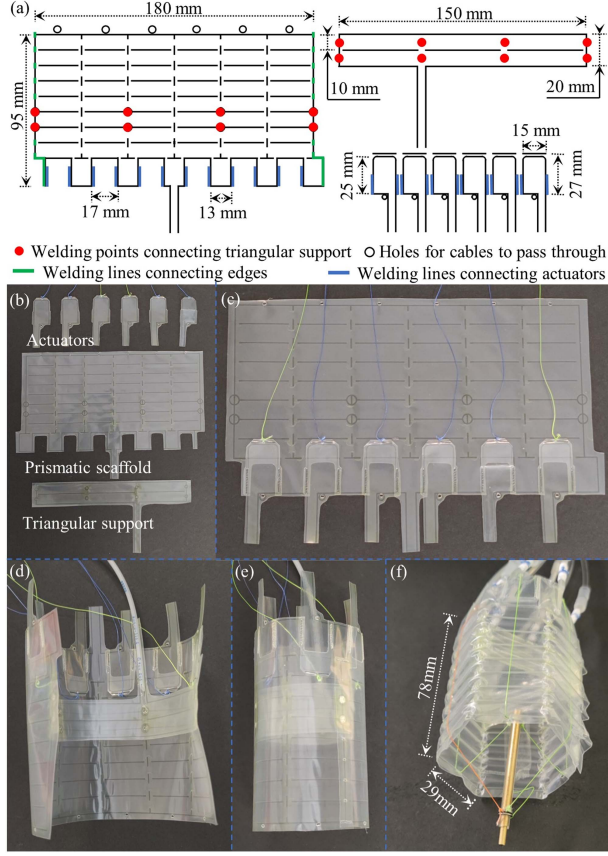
Robot fabrication. (a) Welding patterns for producing the scaffold layer (left), the triangular support layer (upper right), and the layer for actuators (lower right) with welding areas for their joining. (b) and (c) Cutting and manually welding actuators along blue lines in (a). (d) Manually welding triangular prism support according to red lines in (a) onto the hexagonal prism layer. (e) Manually welding edges along green lines in (a) to result in a cylinder shape. (f) Lastly, cables are connected to the brass tube end-effector and the robot structure can be inflated and shaped into a hollow regular hexagonal prism.
